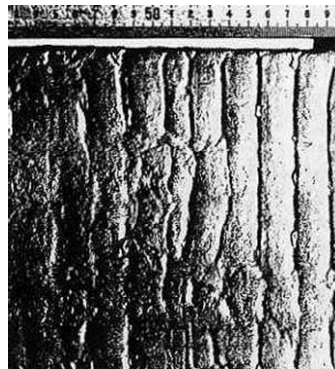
Transverse cracks on a slab (longitudinal section)
